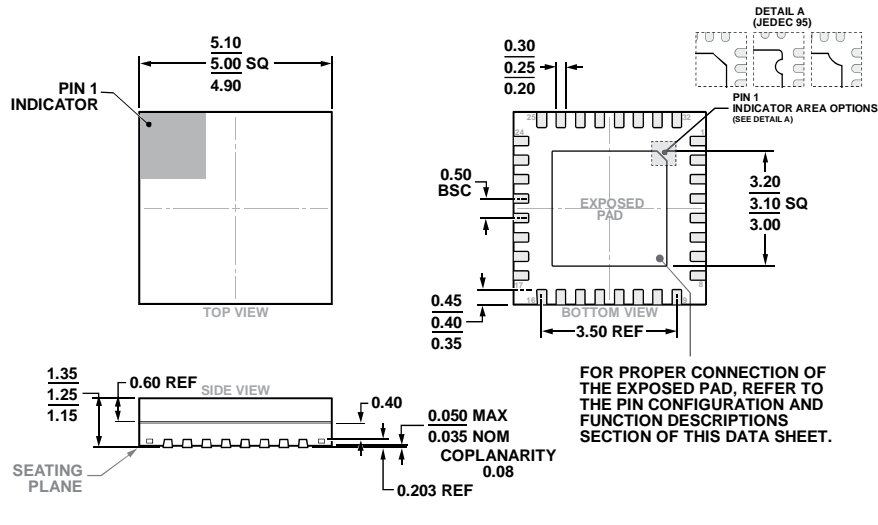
32-Lead Lead Frame Chip Scale Package, Premolded Cavity [LFCSP_CAV]
